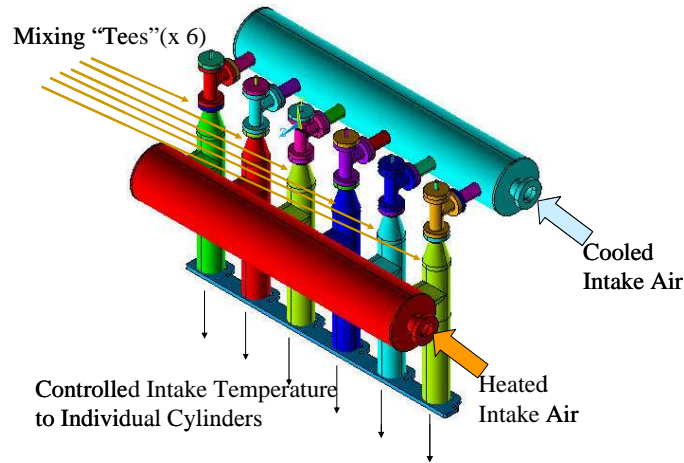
Schematic of dual manifold intake system used for cylinder-by-cylinder engine control. Control valve motors, not shown, go on top of the mixing tees.
